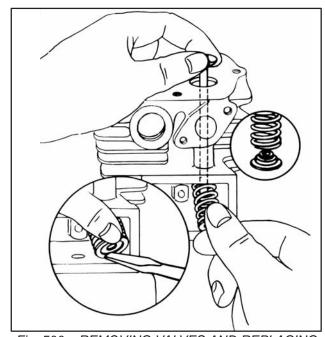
REMOVING VALVES AND REPLACING VALVES
